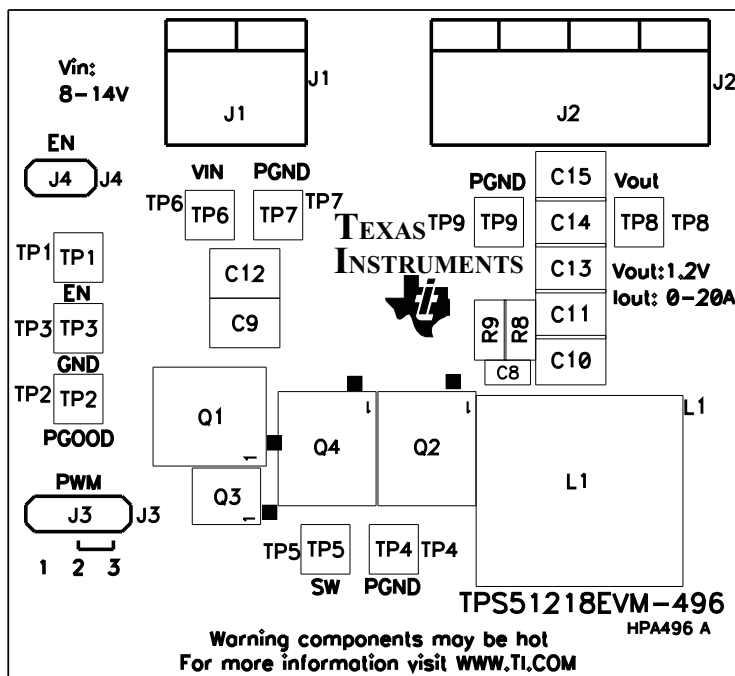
TPS51218EVM Top Layer Assembly Drawing, Top View
